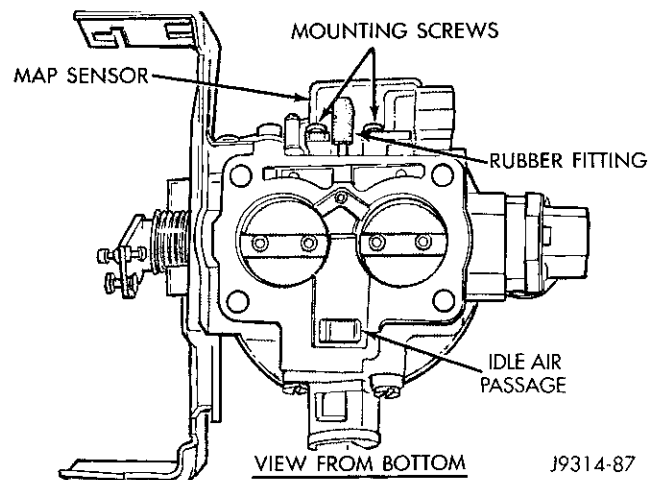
MAP Sensor L-Shaped Rubber Fitting—3.9L/5.2L/5.9L Engines
